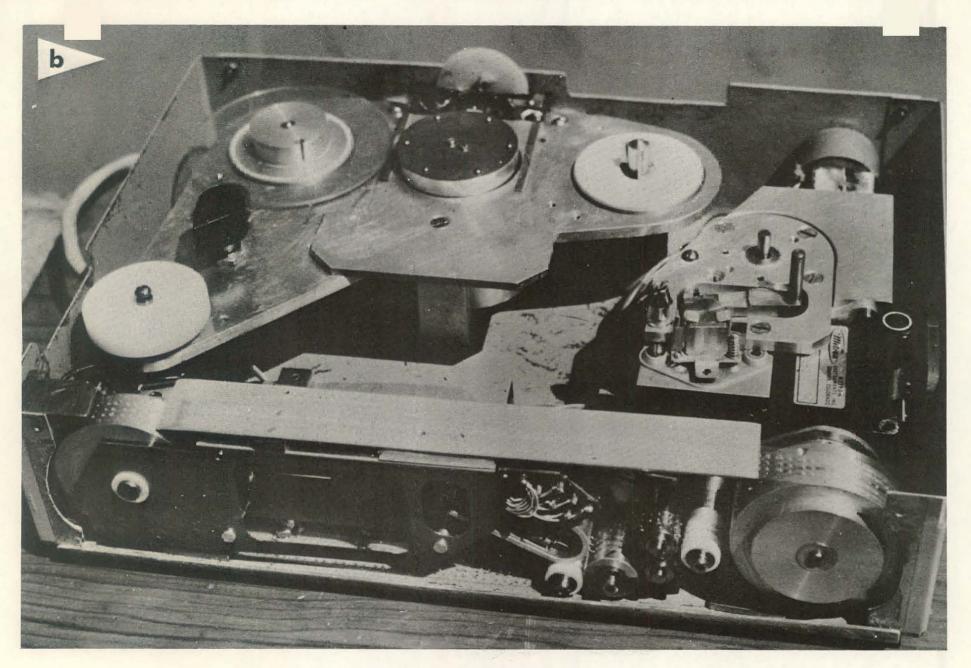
Plan view of Argonne Braille Machine with top and back covers removed to expose tape drive assembly.
